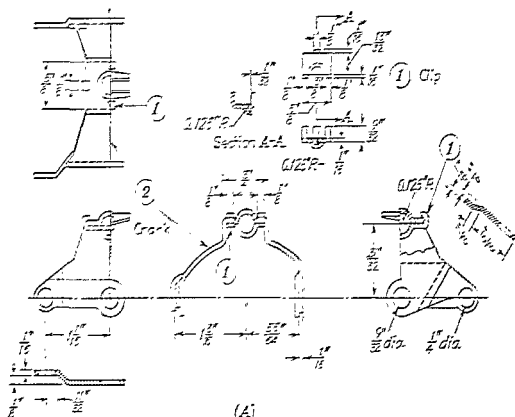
A. Parts assembled in die of Fig. 17-50.
